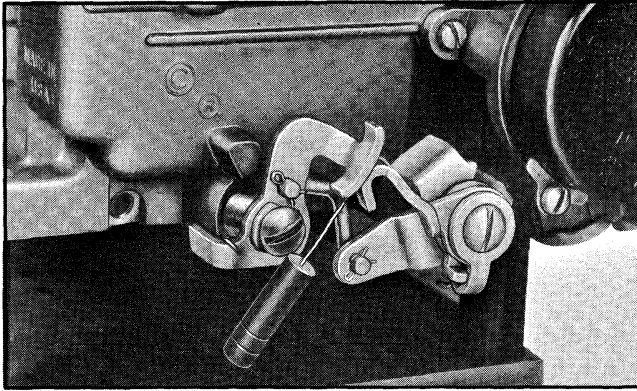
B-100 Checking Secondary Throttle Lever Adjustment
